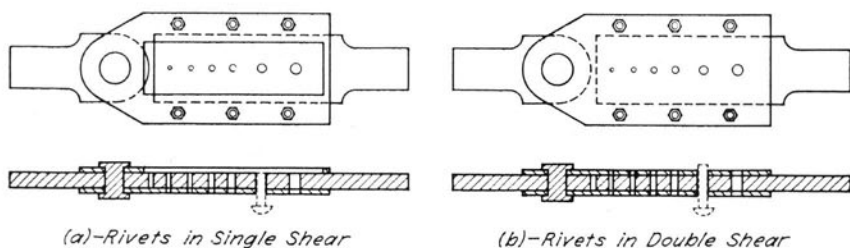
APPARATUS FOR SHEAR TESTS OF UNDRIVEN RIVETS
